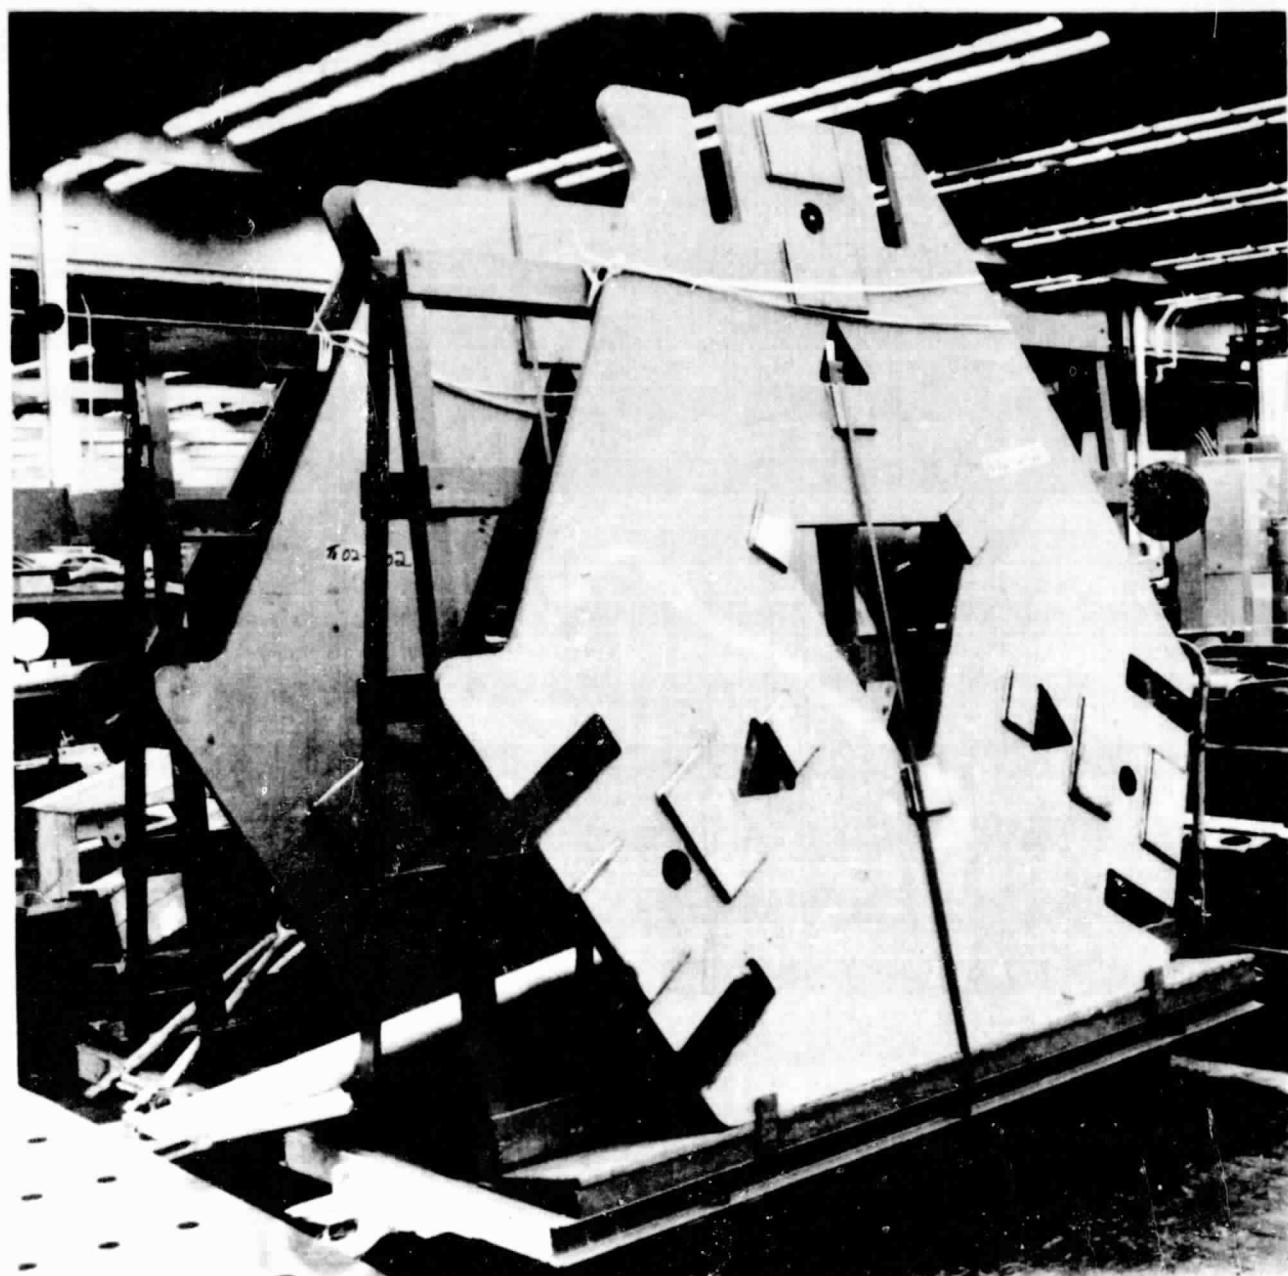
SFDS Bulkhead Weldments
